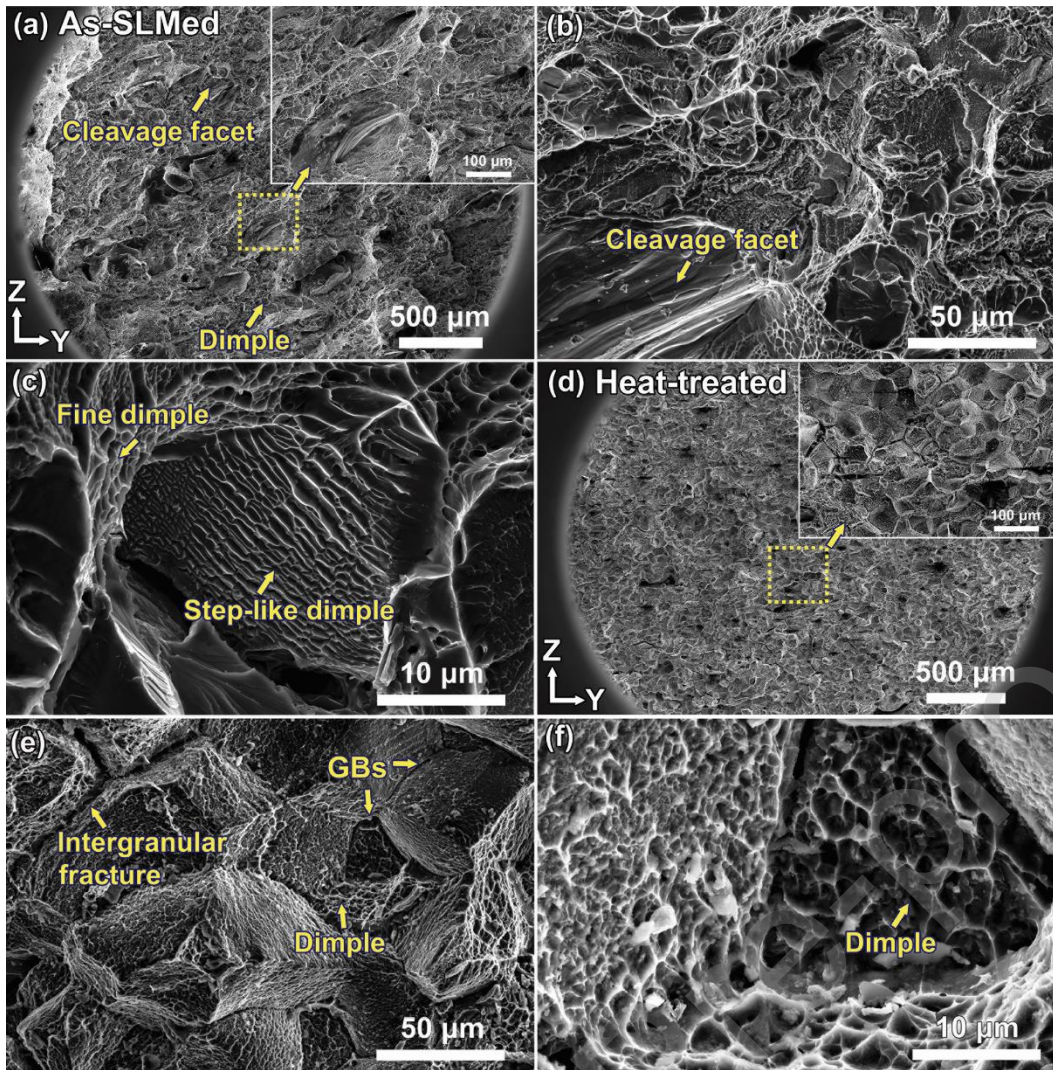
Microstructure of fracture surfaces at the cross section (top view from fracture) after tensile failure: (a)-(c) as-SLMed Ti-35Nb sample, and (d)-(f) heat-treated counterpart.
